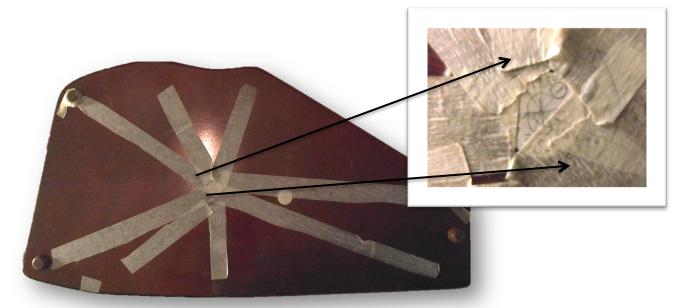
Illustrates the process of measuring the dimensions of the Schmidt Harp body
